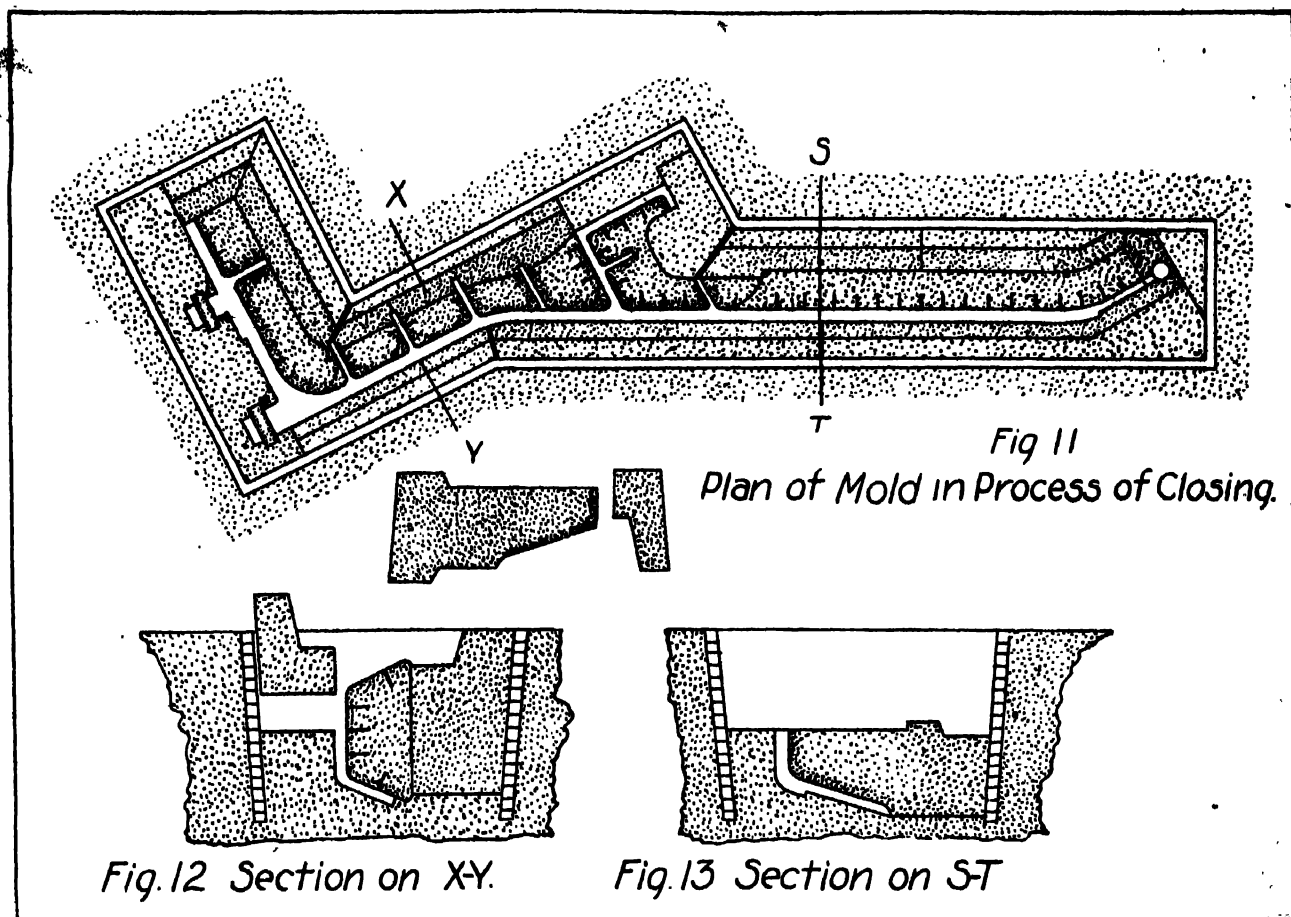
PLAN OF MOLD PARTLY ASSEMBLED FOR CLOSING FIG. 12—SECTION AT X Y FIG. 13—SECTION AT S T
